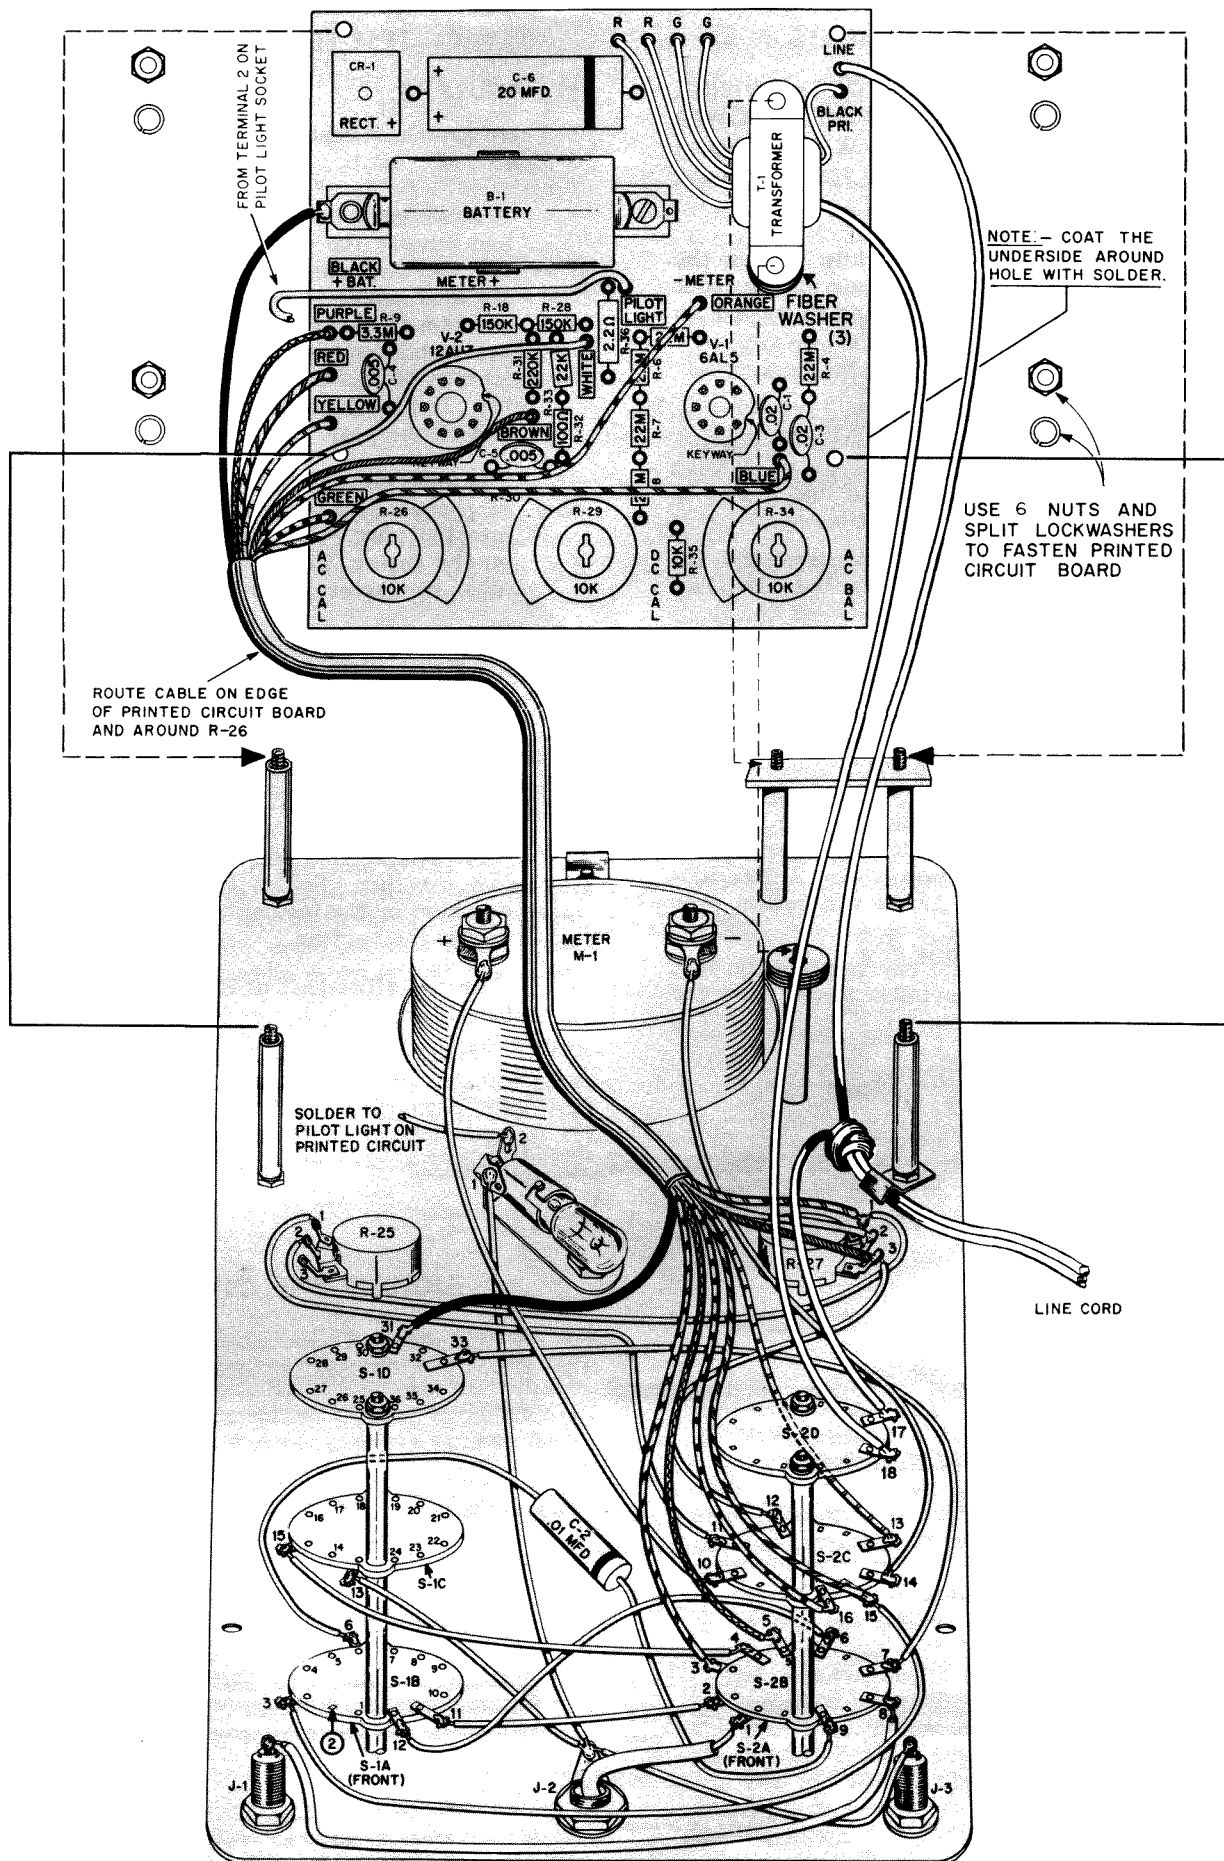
HOW TO MOUNT THE PRINTED CIRCUIT BOARD
